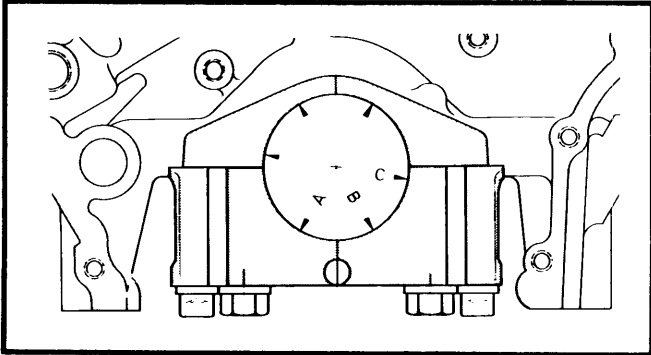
Locations for Measuring Main Bearing Bore Diameter
